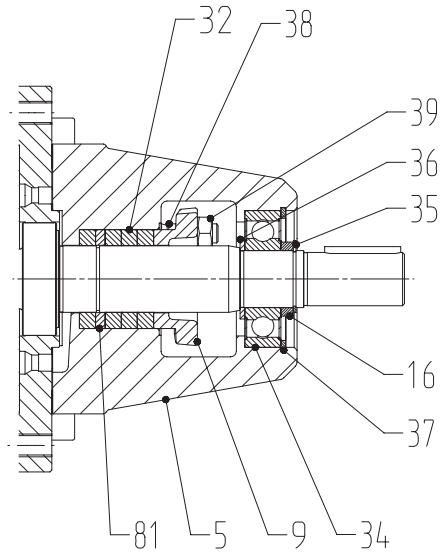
SN..ER..KA2, external bearing, incapable of relubrication, stuffing box packing
